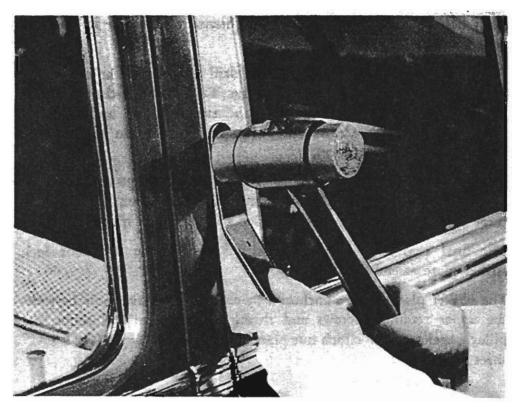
When Spring Hammering Door Flanges, Tape Painted Surfaces and Hold Body Spoon Flat.
